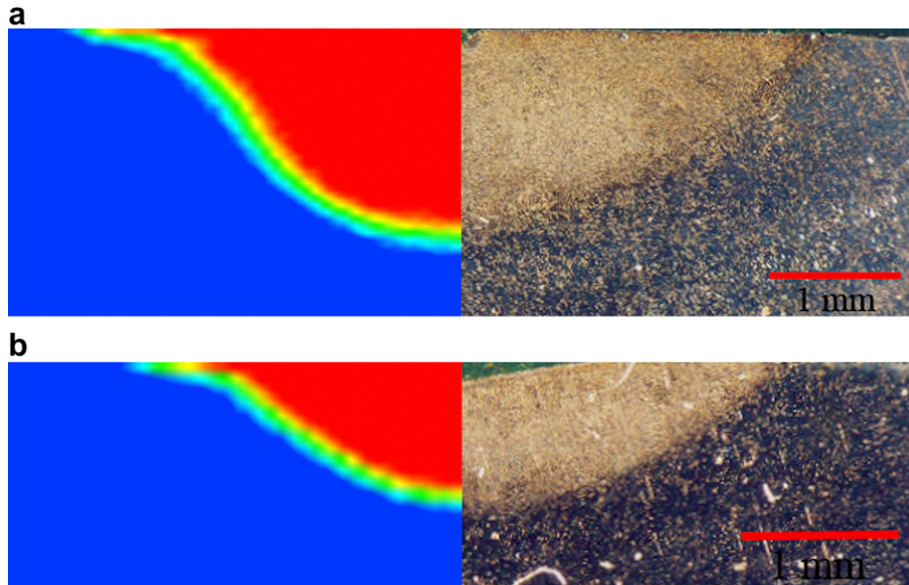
Experimental and calculated weld pool cross-sections for GTA welds obtained by using conditions of samples (a) WC1; and (b) WC2.
